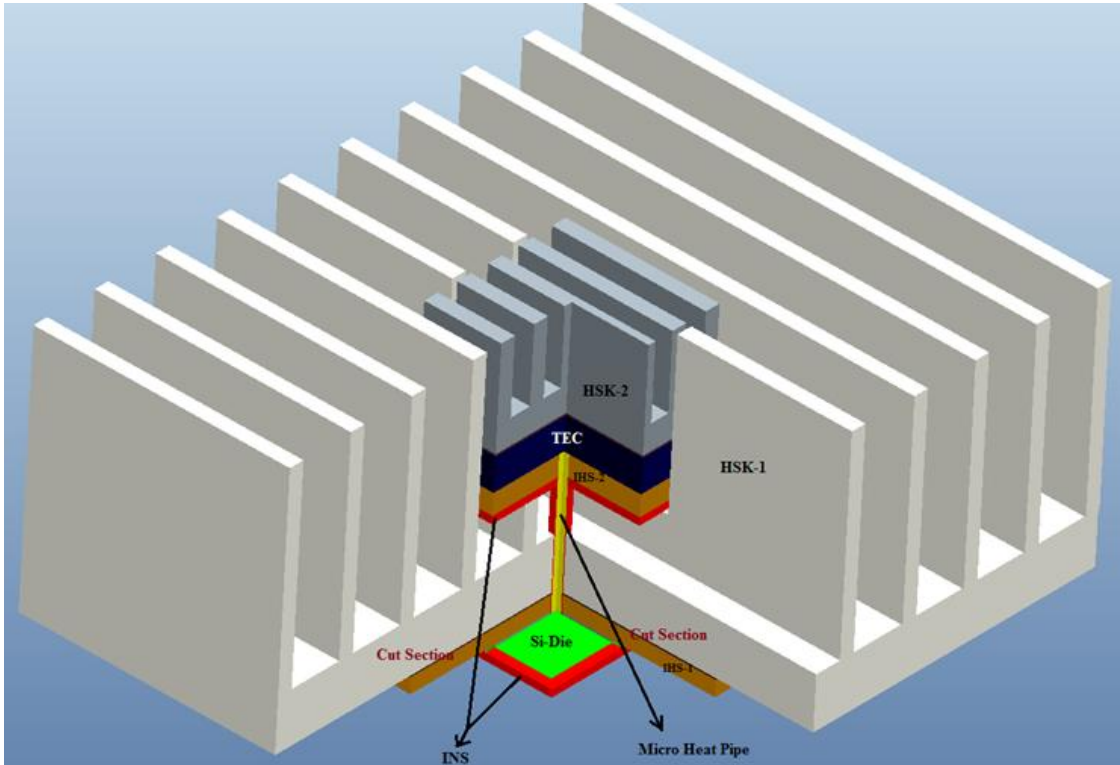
Cut section view of the complete chip package in Pro/ENGINEER
